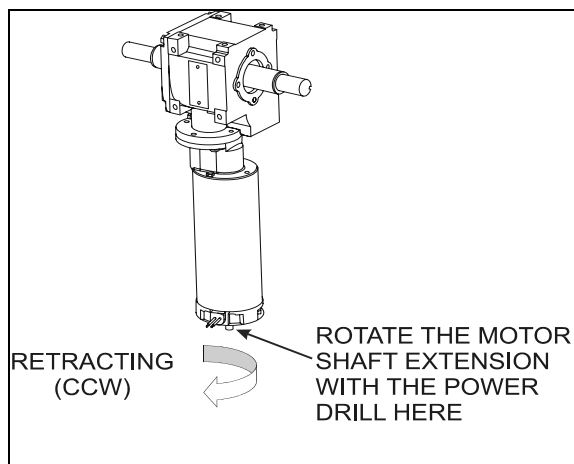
SLIDE-OUT MOTOR ROTATION
